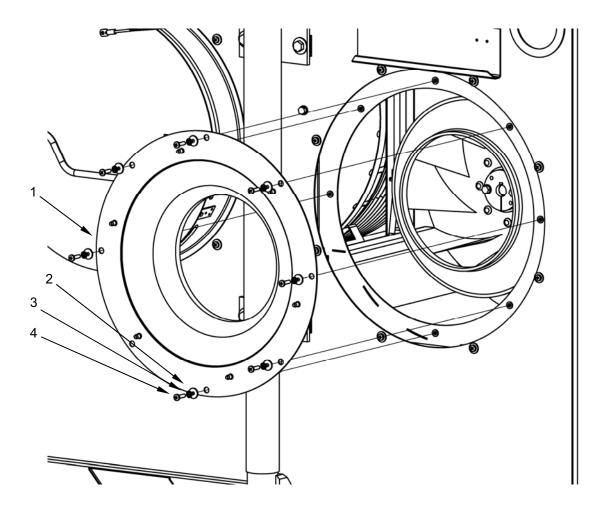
Inlet Fan Assembly (Sheet 1 of 3) 0100 00-2
